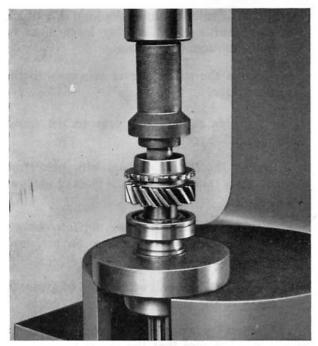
Installing the main drive pinion bearing. Note position of circlip groove in outer race relative to the gear
